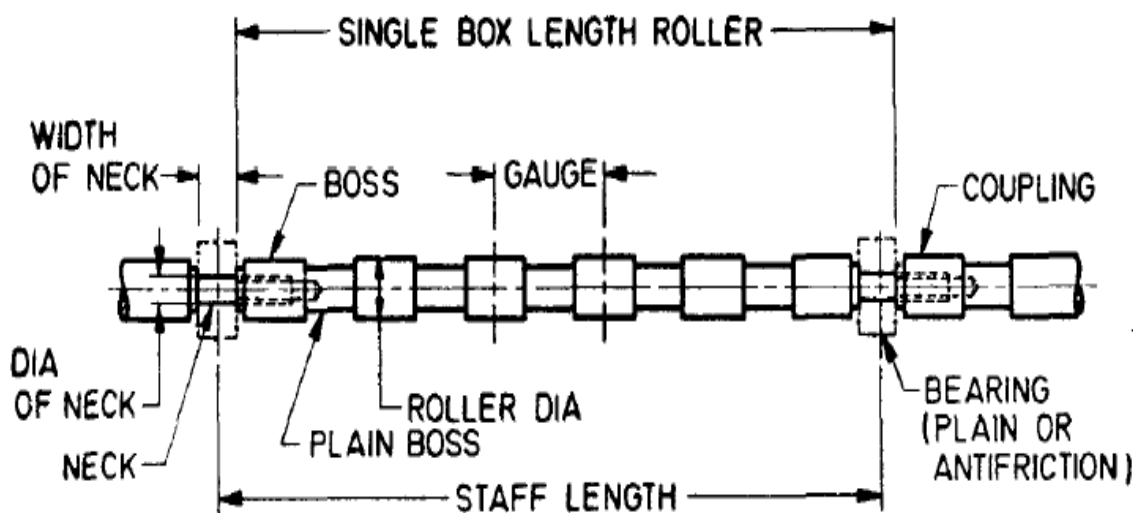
TYPICAL LAYOUT OF A BOTTOM ROLLER
